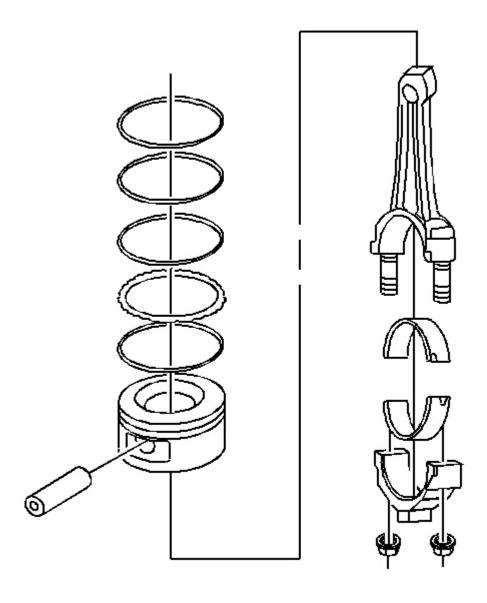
Piston & Connecting Rod Components Courtesy of GENERAL MOTORS CORP.
